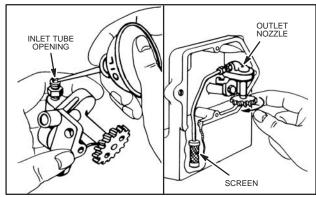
HORIZONTAL ENGINE OIL PUMP
